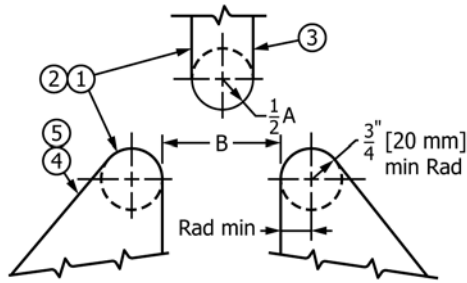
Alternative Roller-Equipped Guided-Bend Test Jig
